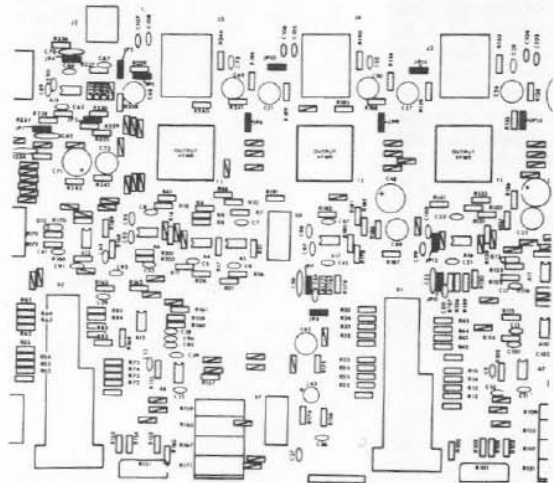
Transformer Mounting Locations. Jumpers to Cut are Shown as Solid Rectangles.
